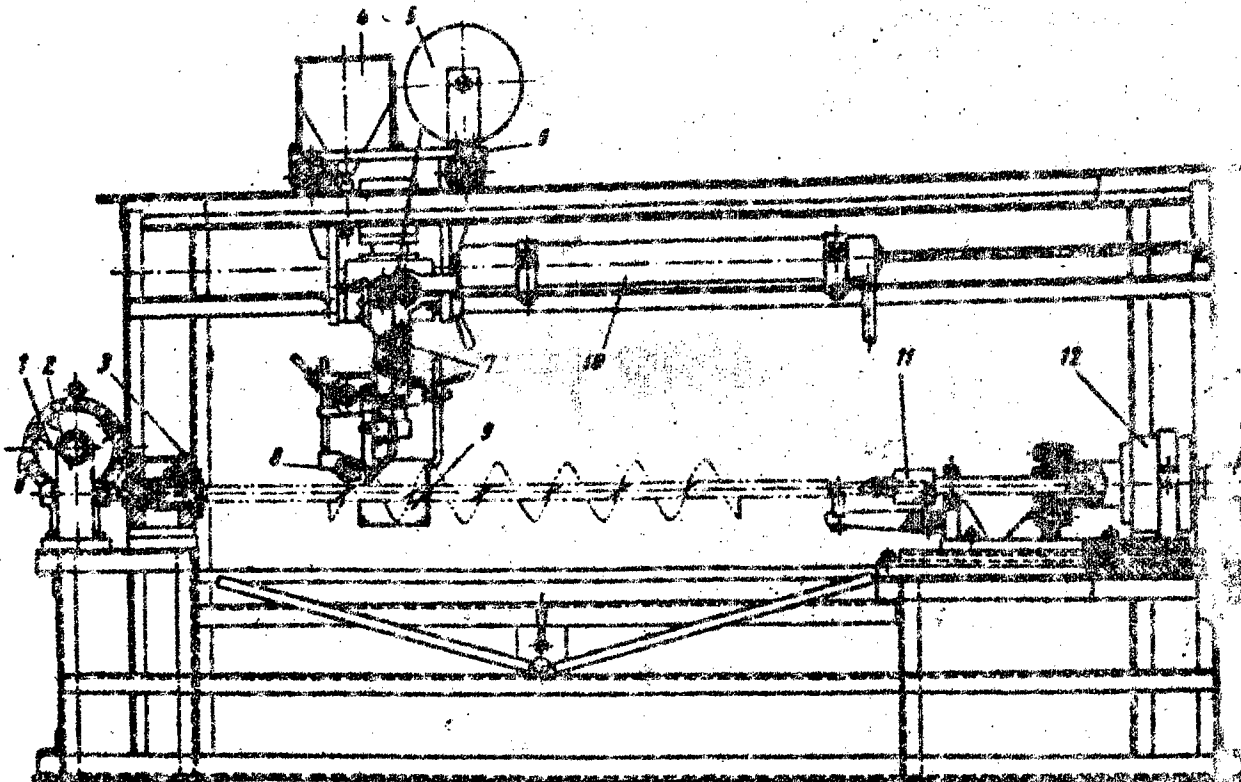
Automatic mechanism for welding spiral blade to auger:
